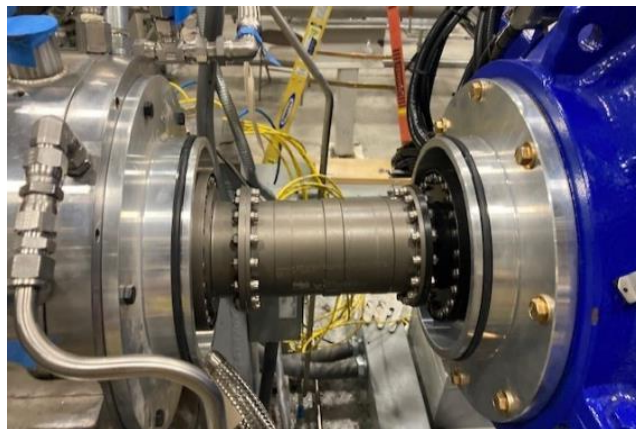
High-Speed Coupling Installed Between Turbine and Gearbox
